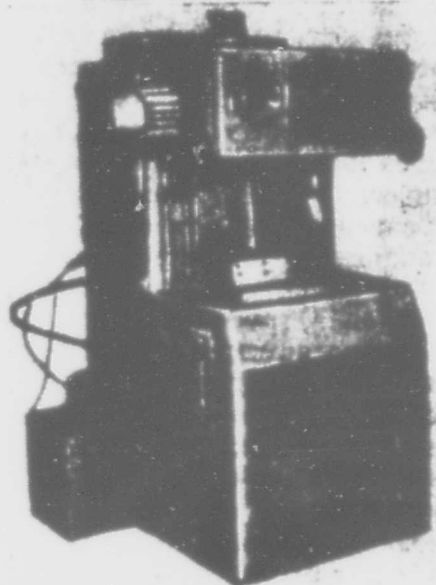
Anode-mechanical machine for cutting pipes.
